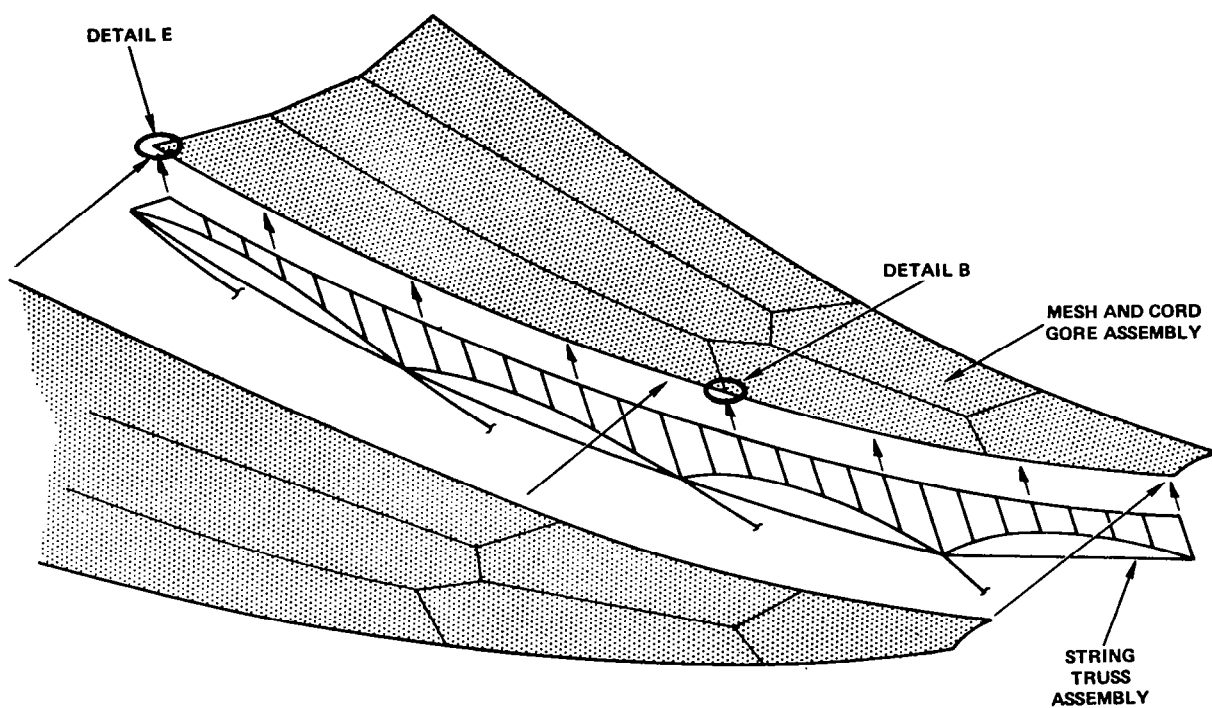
Gore Assemblies and String Truss Assemblies are Laced Together at Top Assembly
